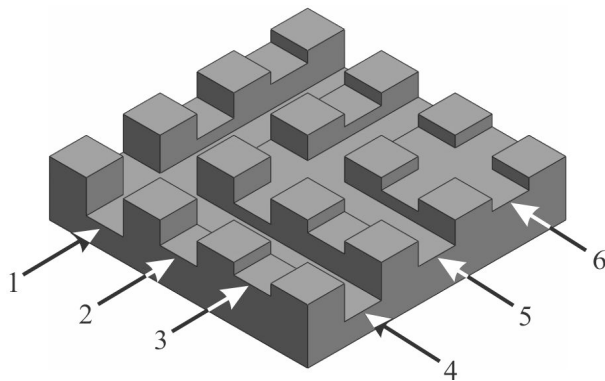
First test part geometry with cross-hatch pattern. The direction of cutting is indicated by the arrows
